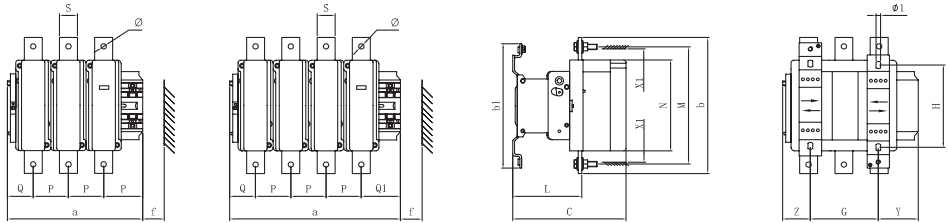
Outline and installation dimensions of CJX2F-630, 6304, 800, and 8004
